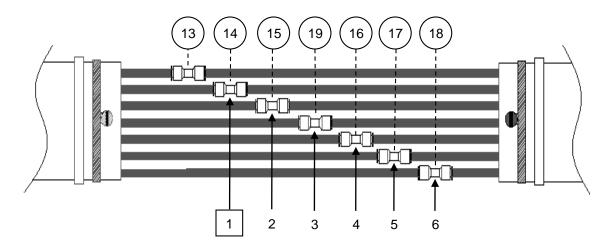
Install Outer Ring Tube 1 Coupling Opposite Inner Ring Tube 14 Coupling
